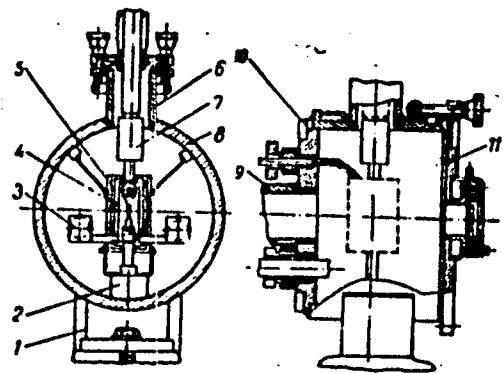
Working chamber of the installation VTU-2V. 1 - foundation plate; 2 - clamps; 3 - current leads; 4 - specimen; 5 - heating installation; 6 - chamber top; 7 - hinged installation; 8 - body of chamber; 9 - exhaust nozzle; 10 - back cover; 11 - front cover.
